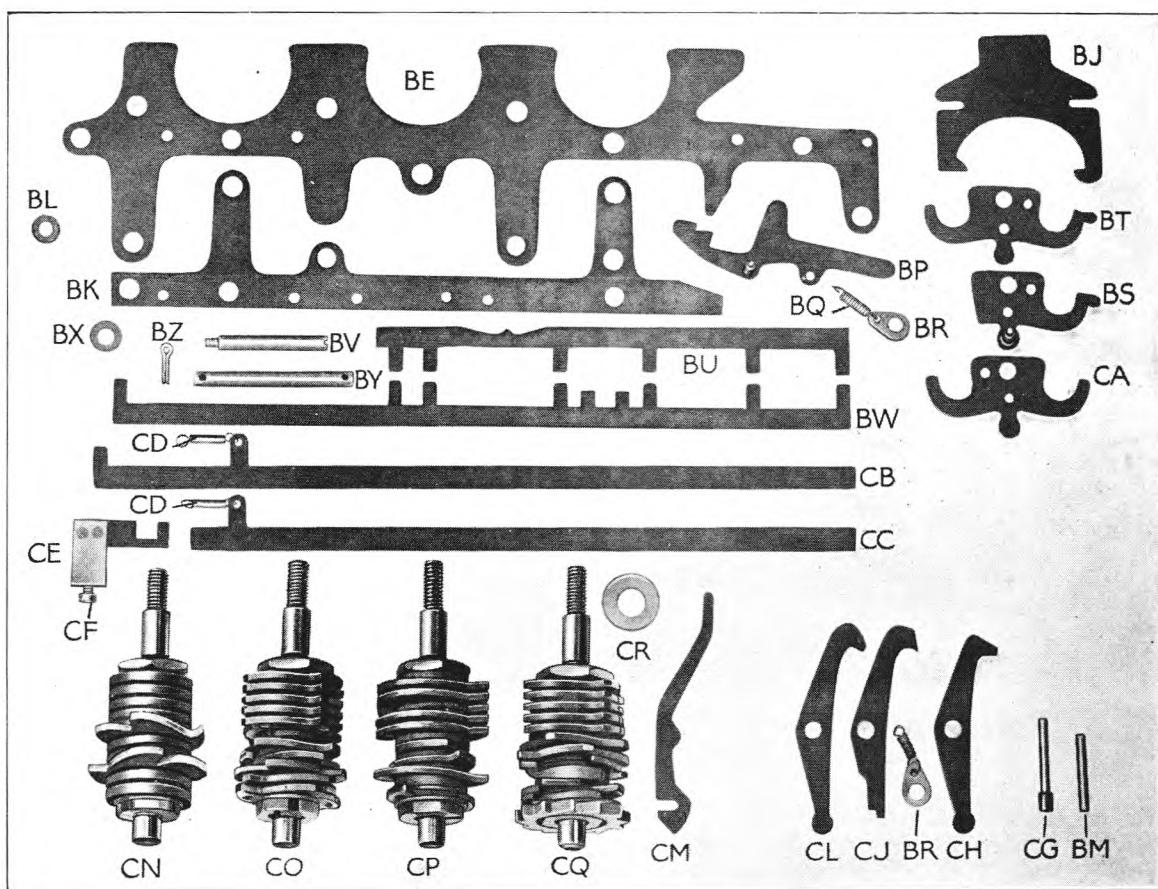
TRANSFER UNIT COMPONENTS (For C.T. Keyboards)
